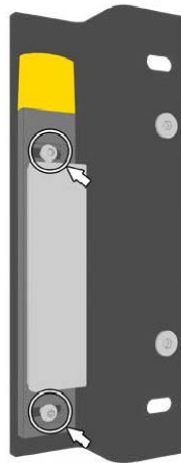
Attach the anchor plate to the mounting plate and tighten the Torx screws M6 x 8 mm.
